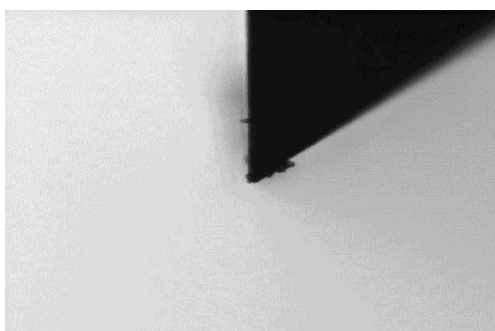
Edge of the blade of cutting instrument in condition (a)
